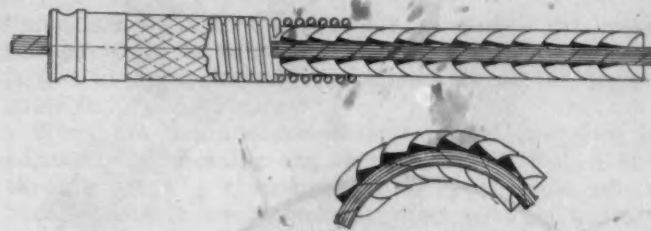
CROSS-SECTIONAL VIEW OF THE CONDUIT AND CABLE CONTROL
